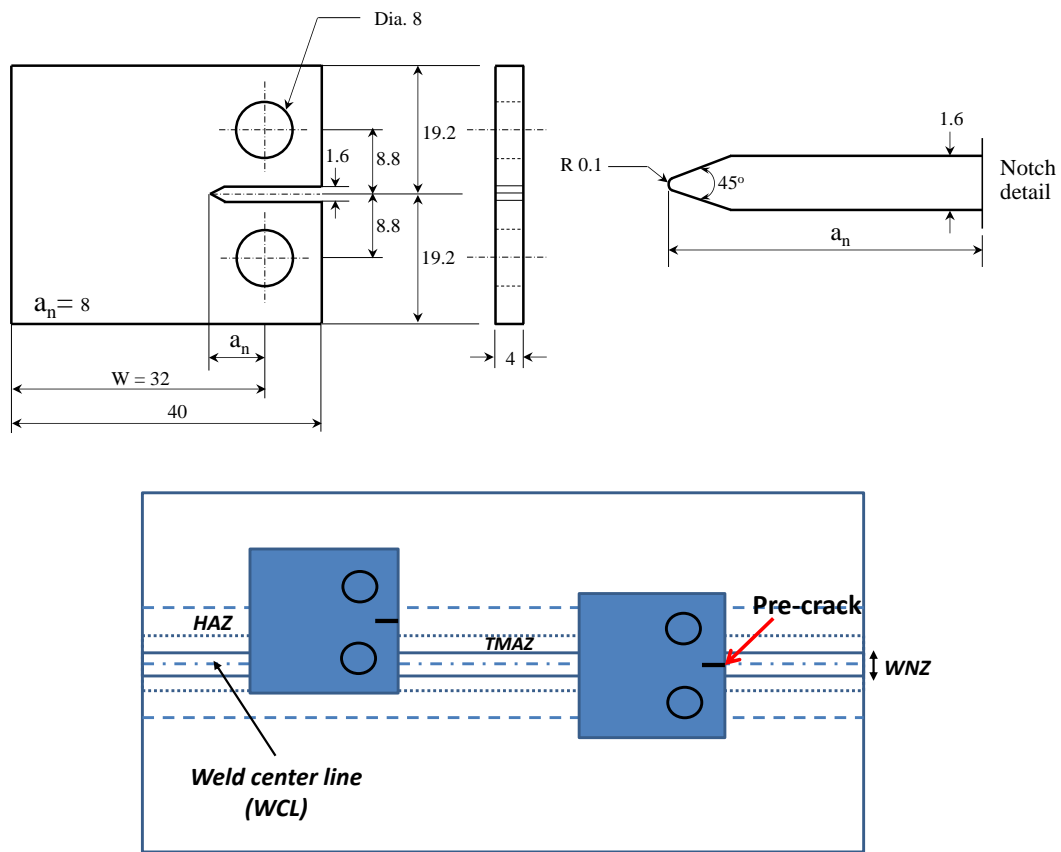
Geometry of CT specimen used and FSWed specimen layout (in mm).
